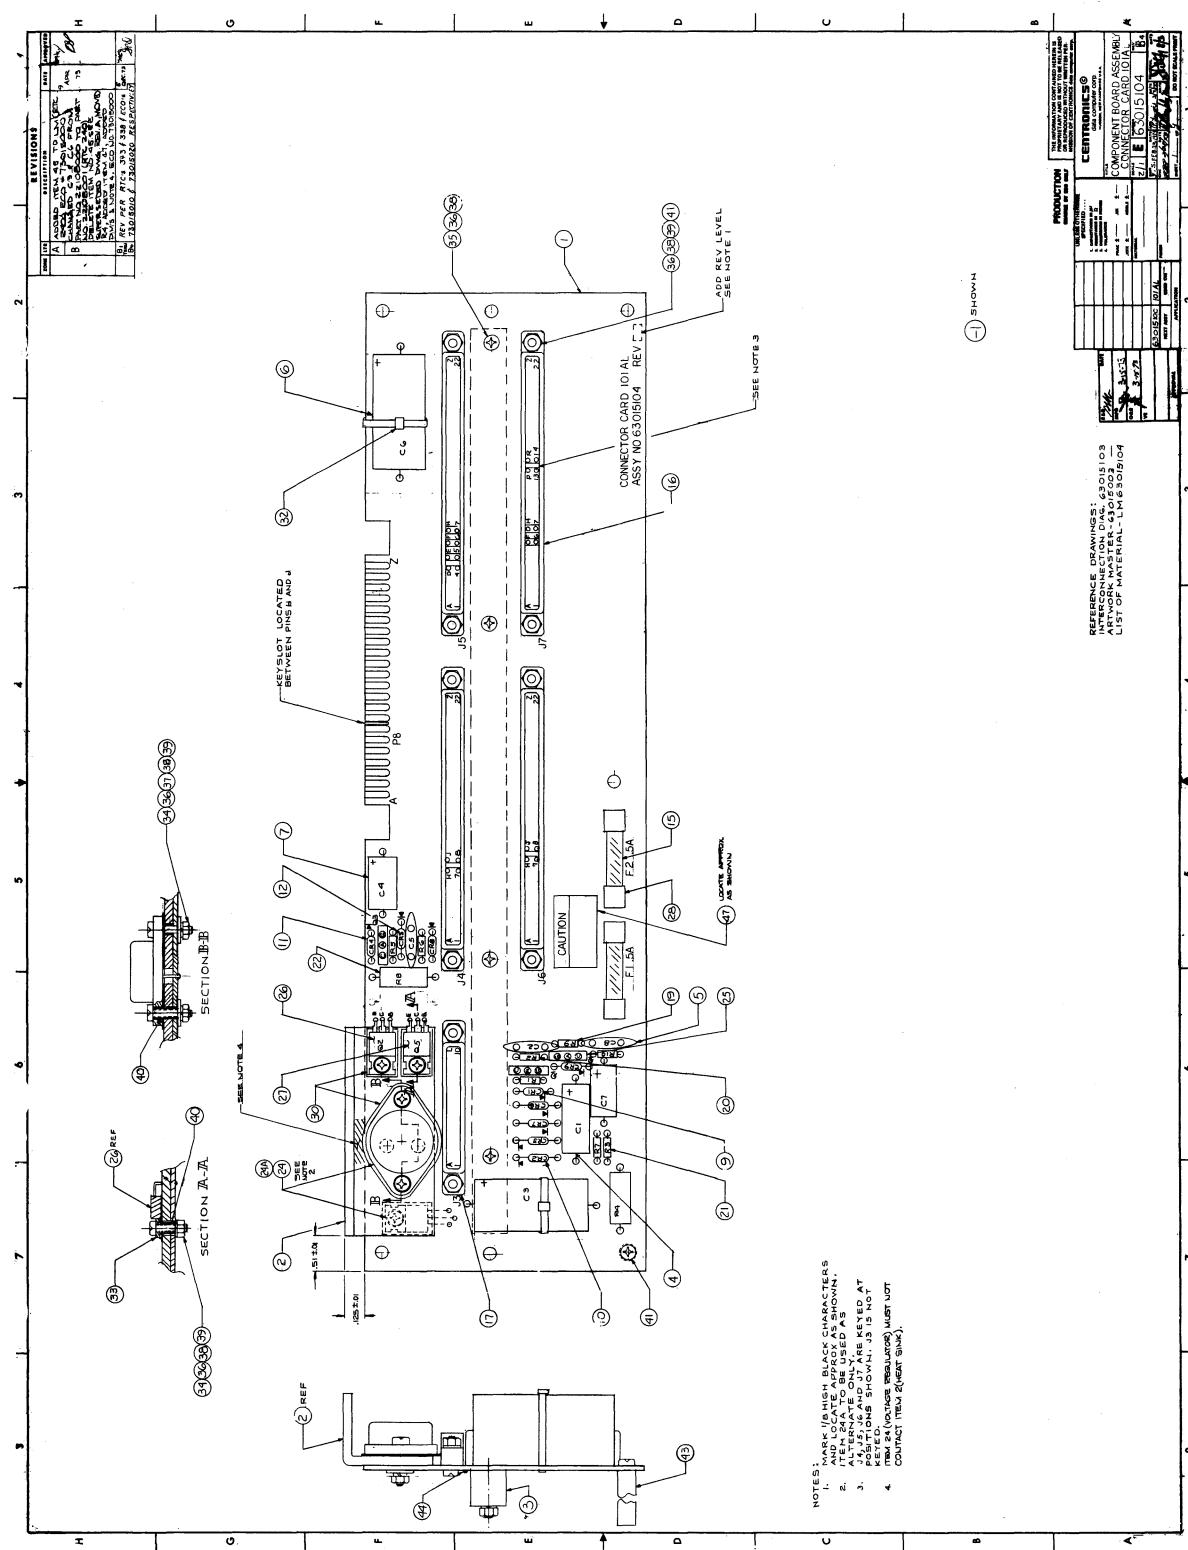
COMPONENT BOARD ASSEMBLY, CONNECTOR BOARD
